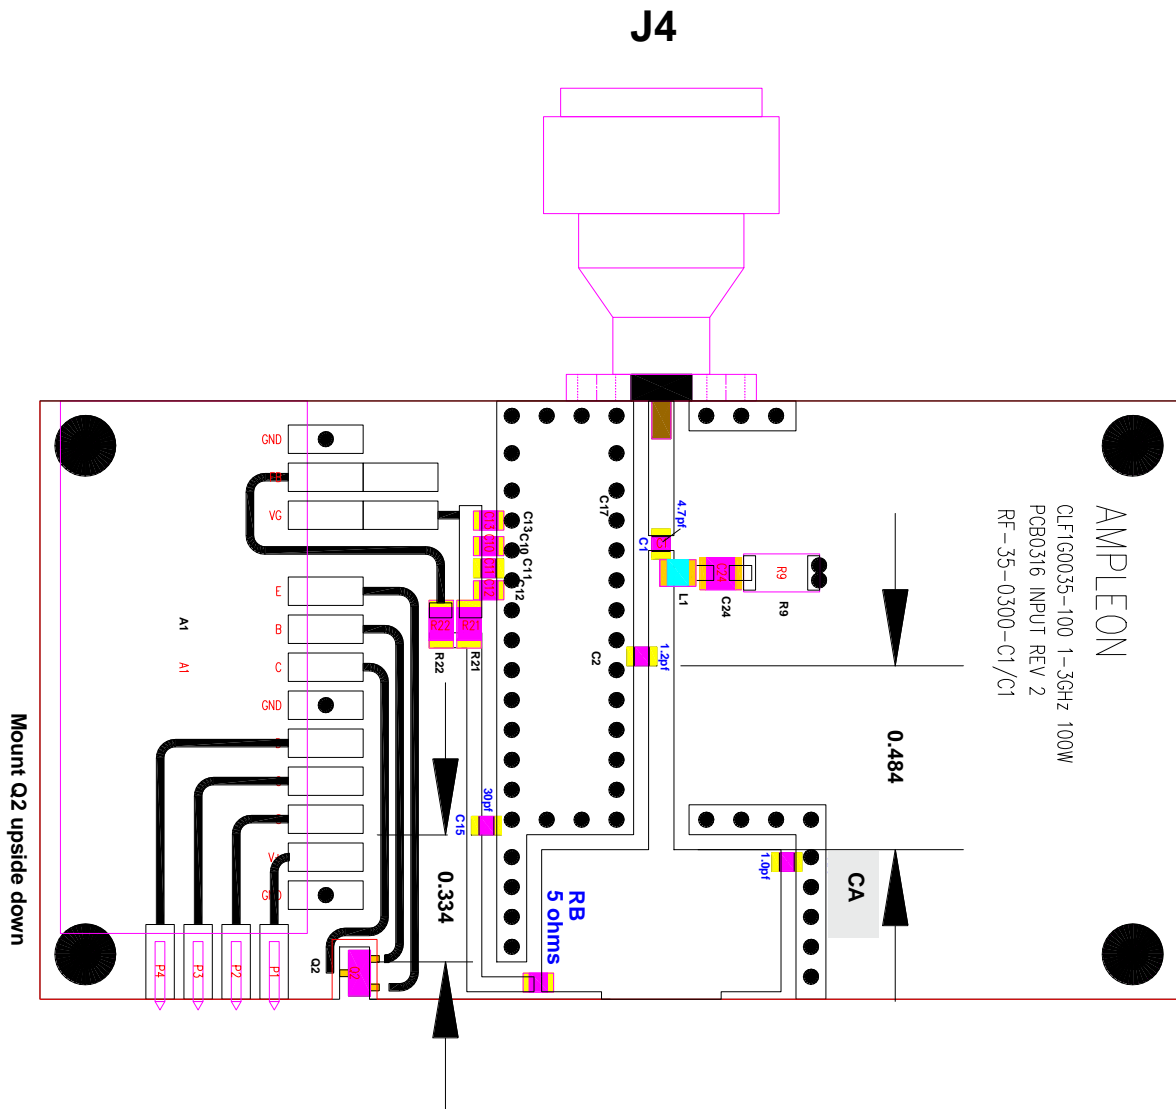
Input PCB Layout with reference designators, added components, and PCB cuts.
